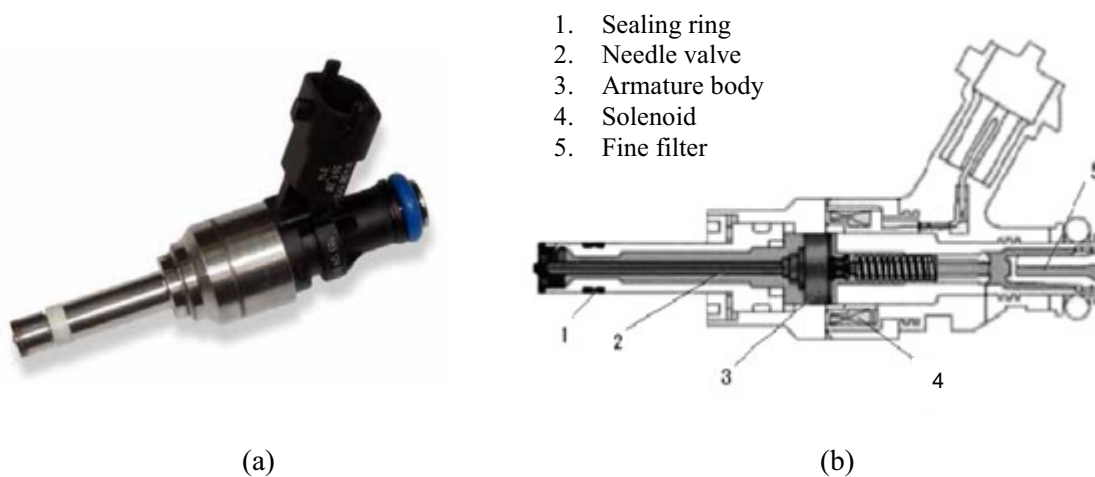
(a). Photo of injector physical appearance and (b) Injector cut-view of Bosch single-hole gasoline direct injector [30].
